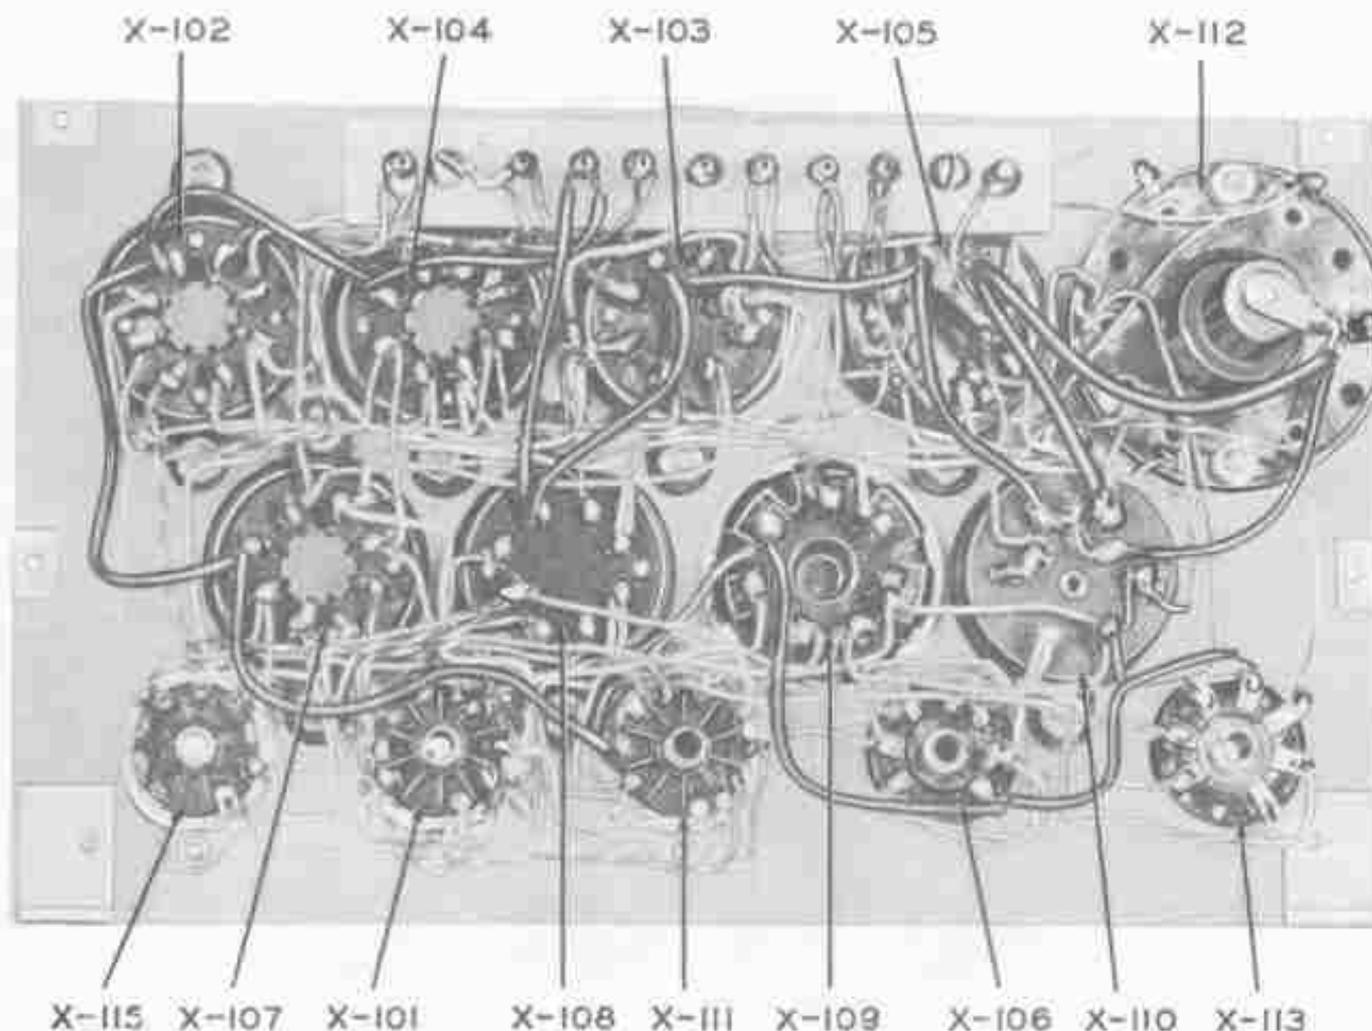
Rear View of Socket Panel of Tube Tester TV-4A/U.
